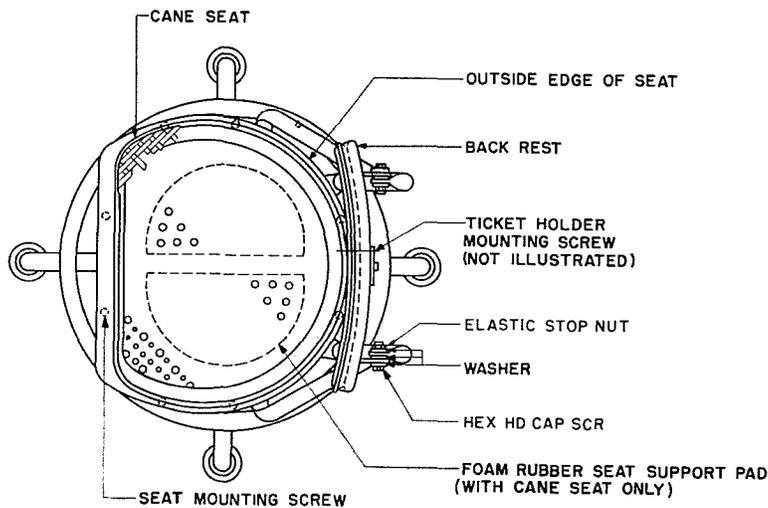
Top View of 1- Through 5-type Operator Chairs
